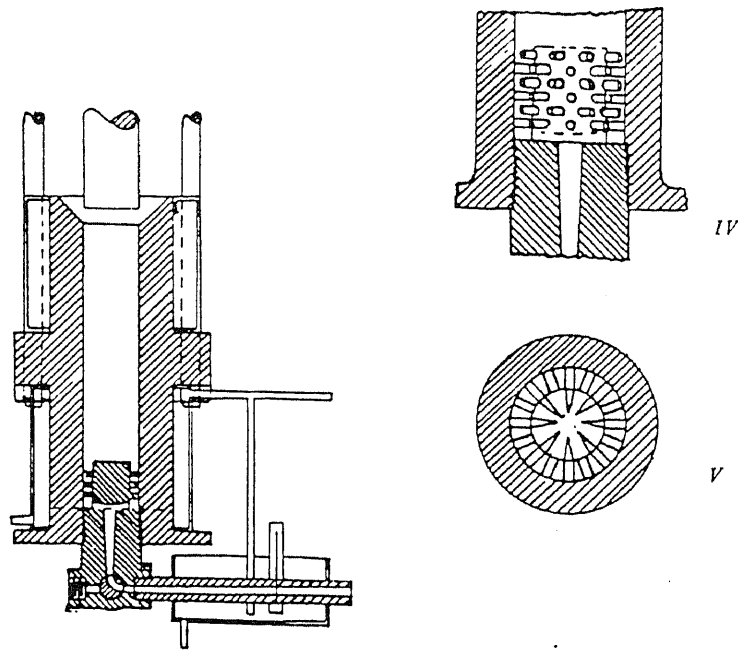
The original drawing for the Hyatt injection molding machine. In view V and IV is to illustrate the heat transfer of material. Reproduced from J.H. DuBois, *Plastics History, U.S.A.*, Caners Books, Boston, 1972. p.216.
